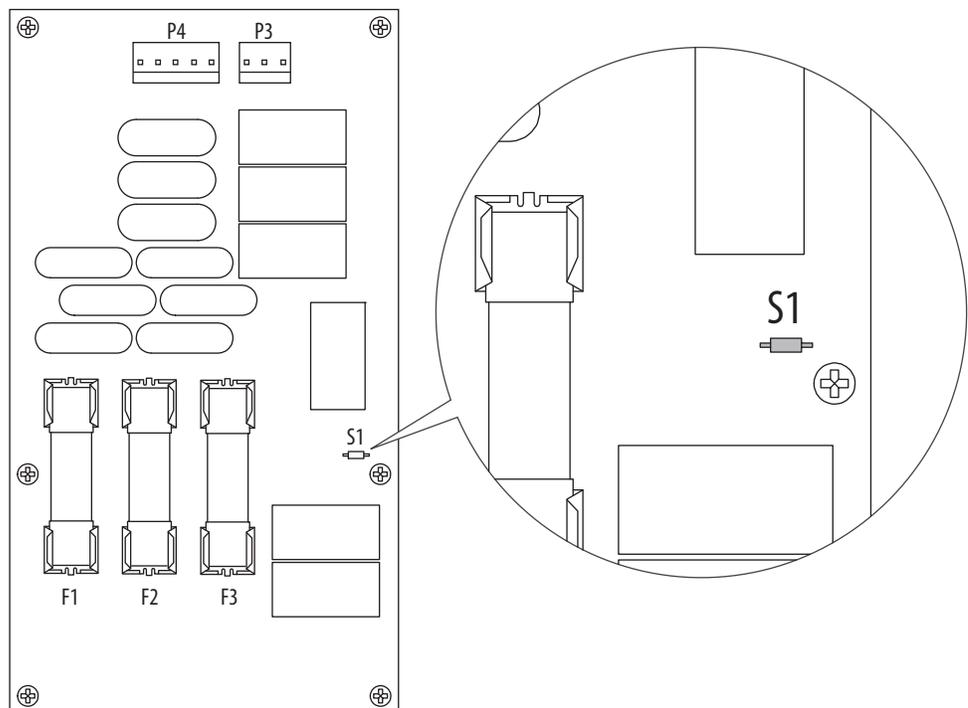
Frame D Pulse Transformer Circuit Board S1 Jumper Location
